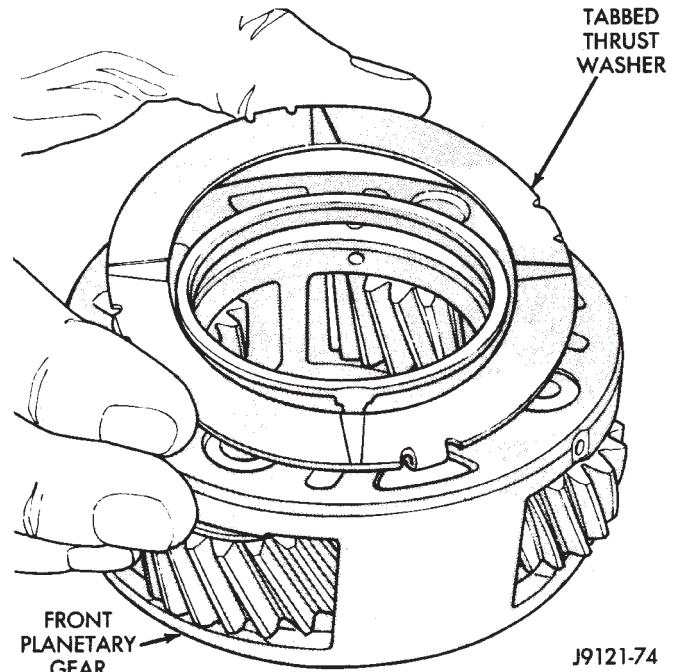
Installing Thrust Washer On Front Planetary Gear—46RH
